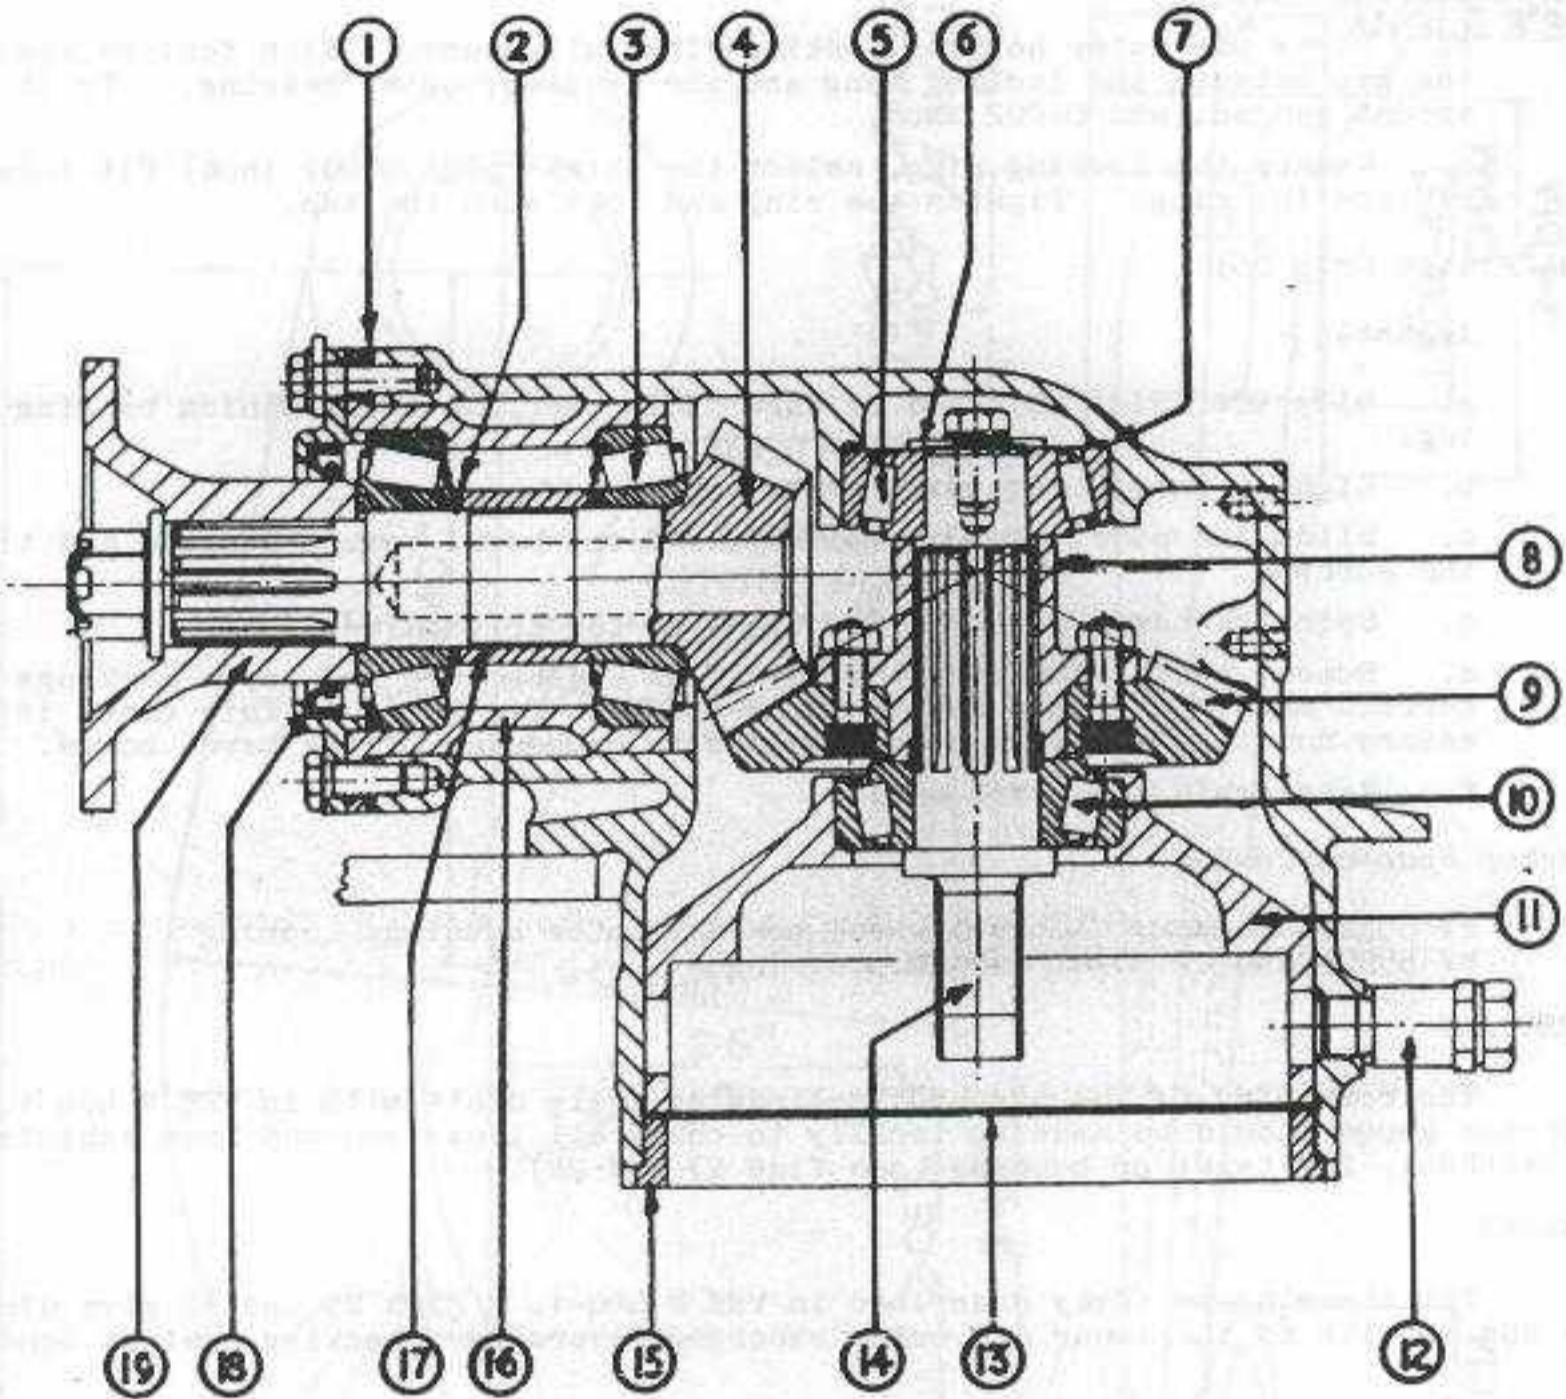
BEVEL BOX - FIXTURE FOR SETTING UP THE BEVEL WHEEL AND PINION TO THEIR CORRECT CENTRES AND GAUGING THE AMOUNT OF SHIMMING REQUIRED FOR BACKLASH
